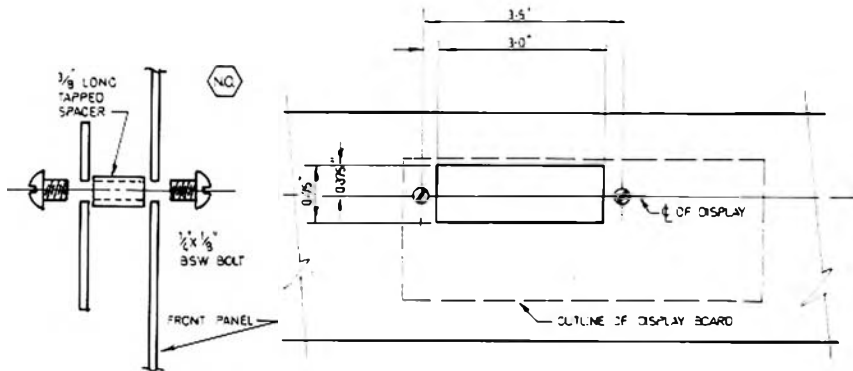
DETAIL OF DISPLAY MOUNTING USING ALTERNATIVE MOUNTING HOLES
